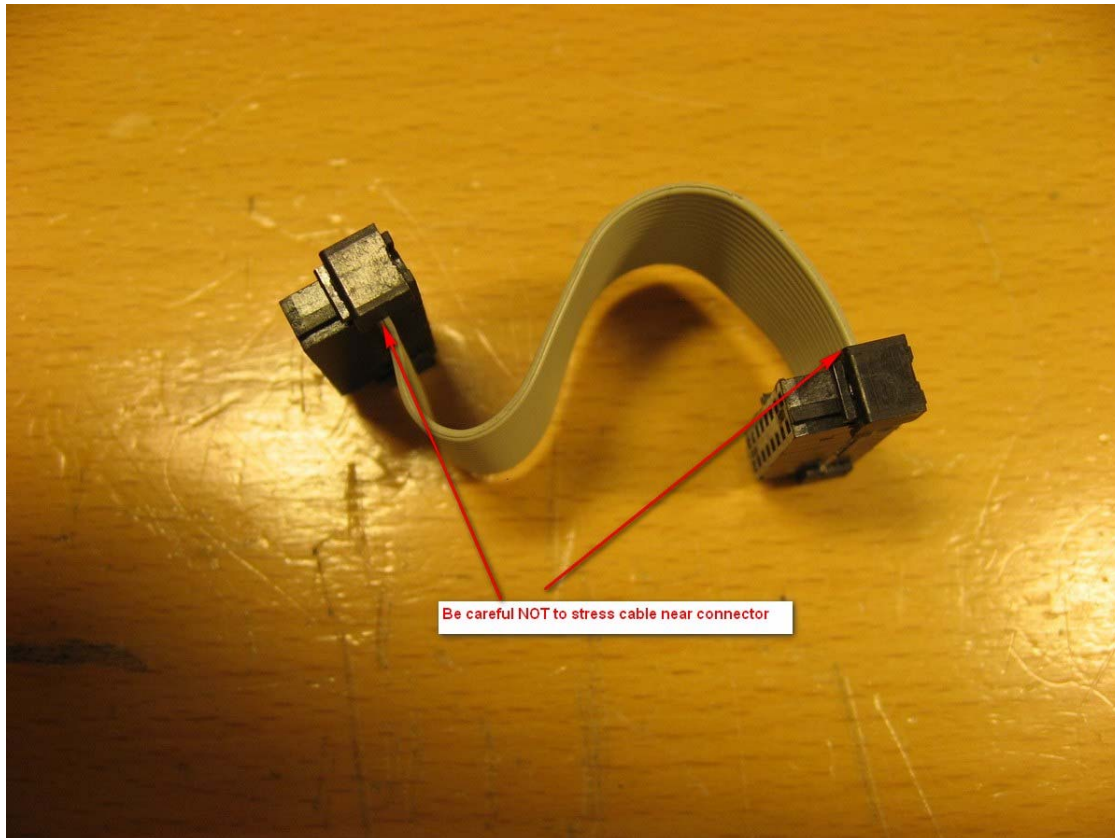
Bend the cable in to shape. BE VERY CAREFUL NOT TO PUT ANY STRAIN ON THE CABLE NEAR THE CONNECTORS!!!!
